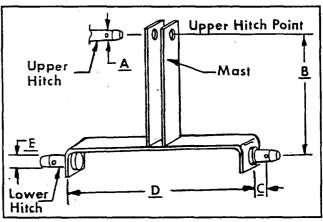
Category 1 & II Implement Dimensions (see chart for dimensions)
